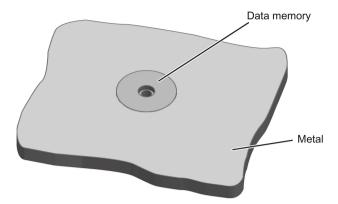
Flush-mounting of the MDS D423 in metal without clearance
